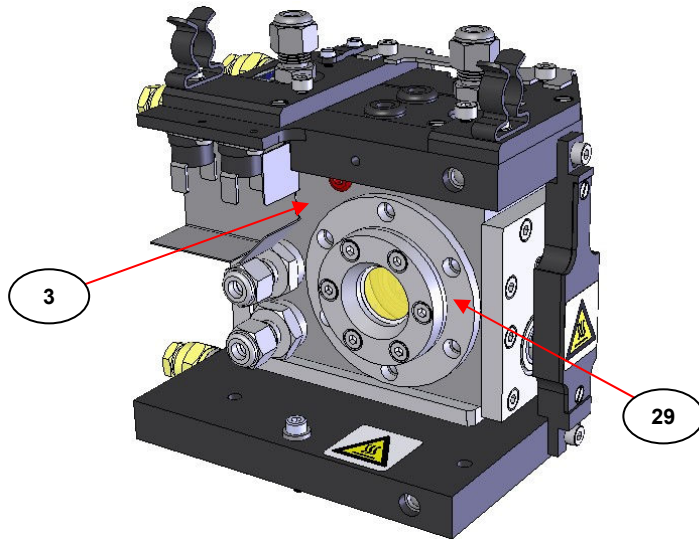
HTHP Cell with Wide Heat Shield (32) and Window Assembly Fixing Bolts (30) Removed
